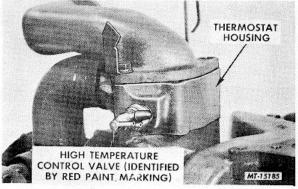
Removing High Temperature Vacuum Control Valve from Thermostat Housing
